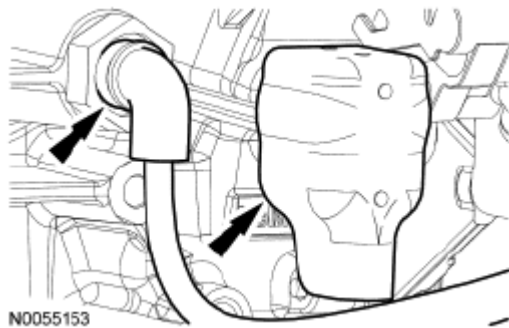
Locating Block Heater Electrical Connector & Heat Shield
